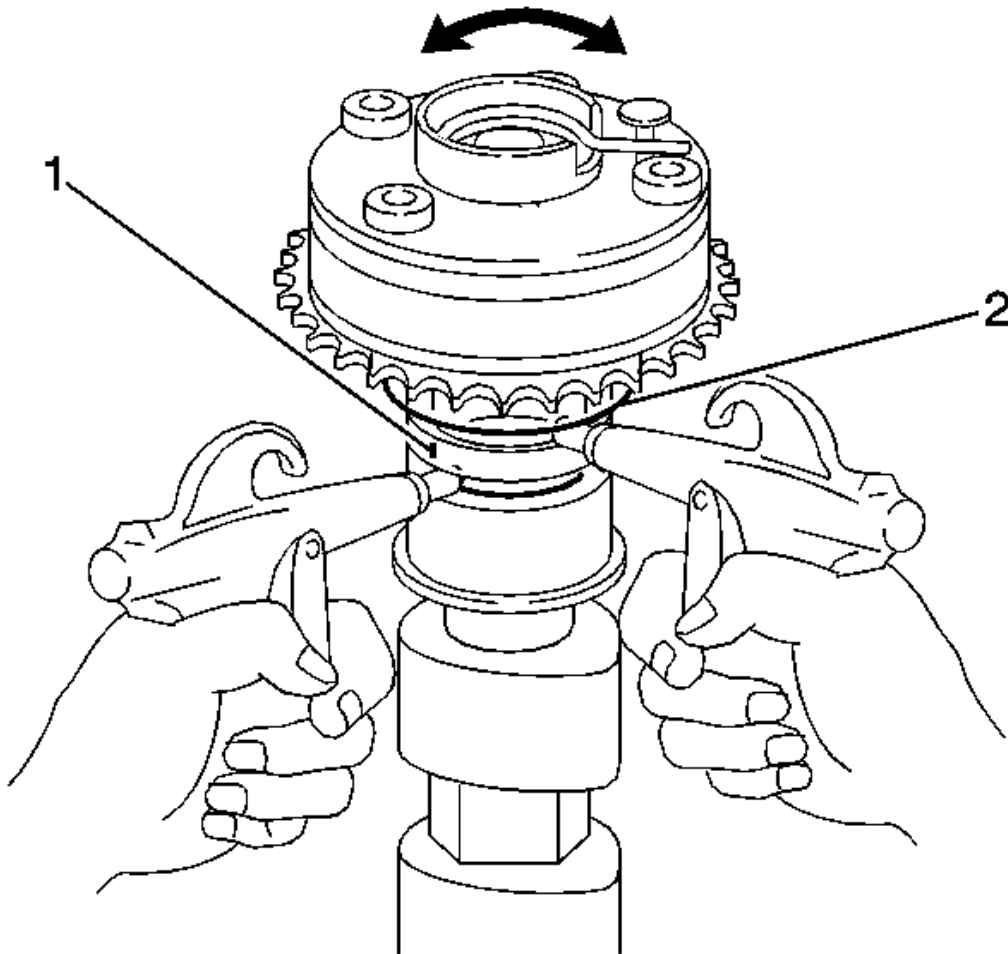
Ensuring Camshaft Timing Exhaust Gear Turns In Retard Direction
